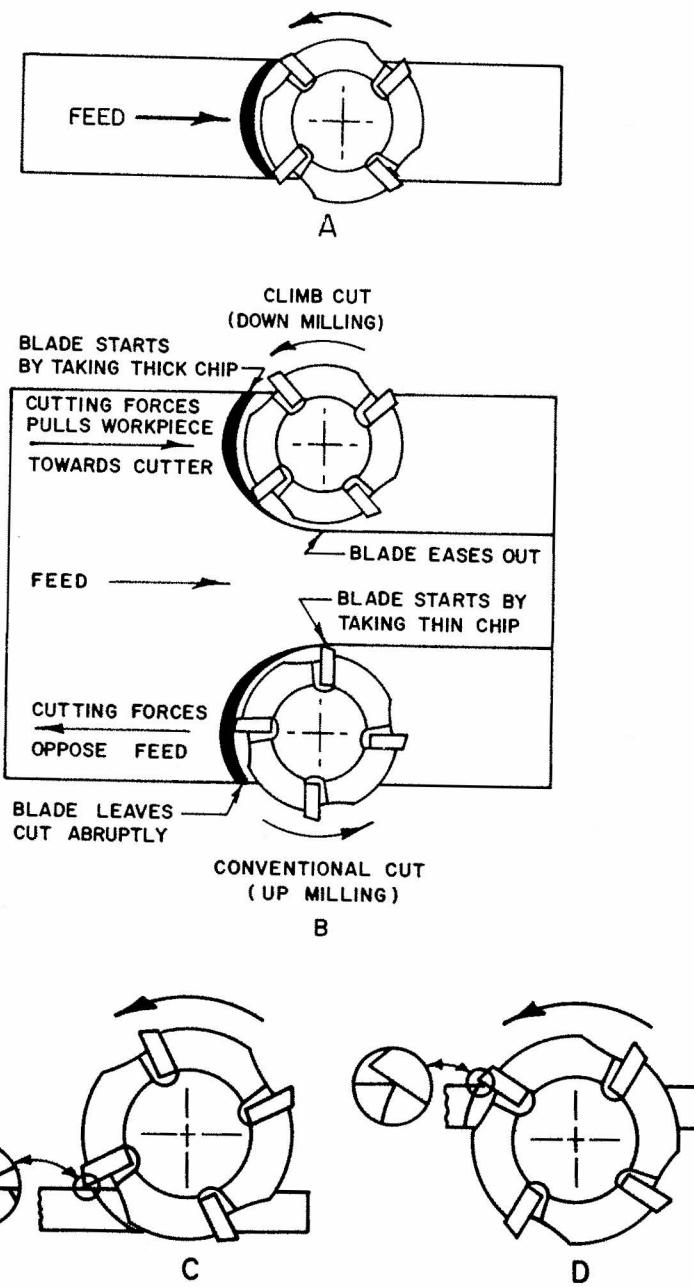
The fundamental methods of face milling. A. Taking a straddle cut. B. Taking a climb cut and a conventional cut. C. Face milling with body outside of workpiece; blade makes initial contact at tip of edge. D. Face mill with body inside workpiece; blade makes contact away from tip of edge.
